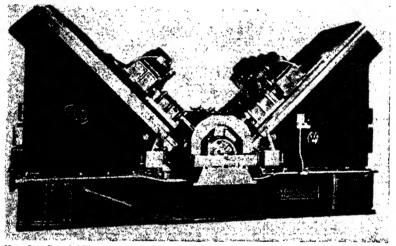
Special Ex-Cell-O boring machine for machining the cylinder bores of V-8 cylinder blocks.
